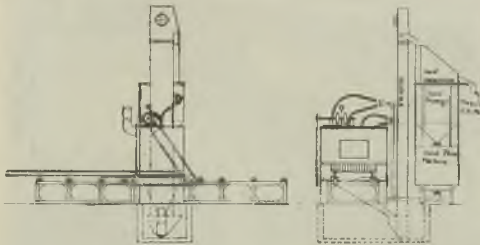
A SAND-BLAST CLEANING TABLE OF THE LONGITUDINAL TRAVEL TYPE.
